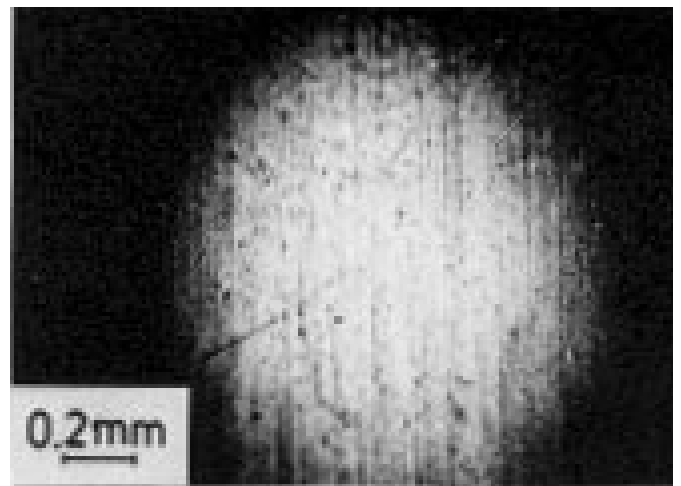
Raceway of sealed-clean bearing after 500 hours of test
